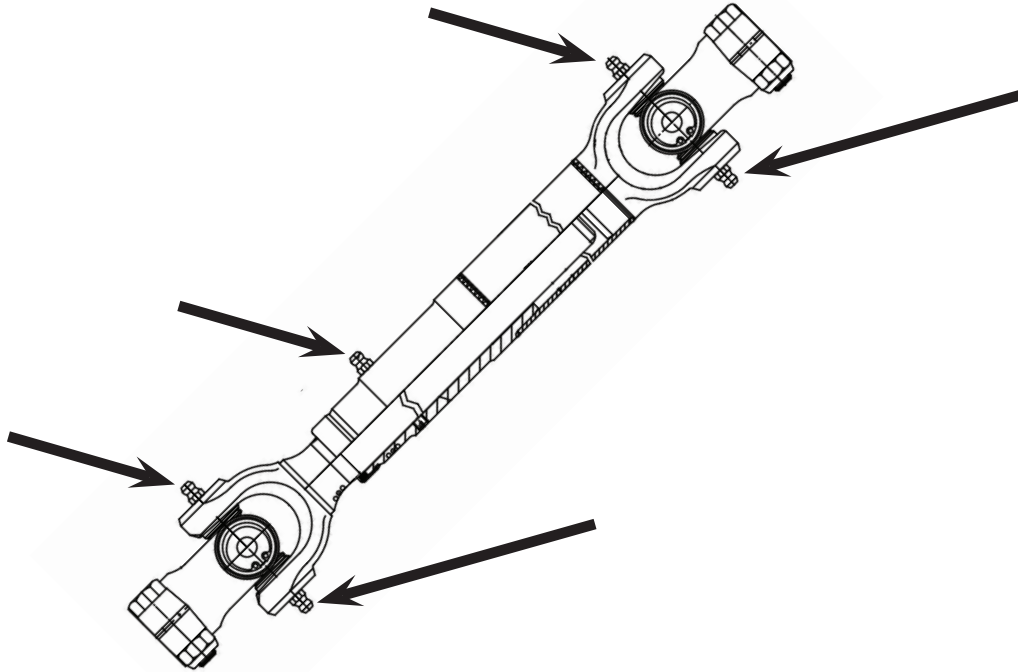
Zerk Fittings on Drive Shaft - Chevy
